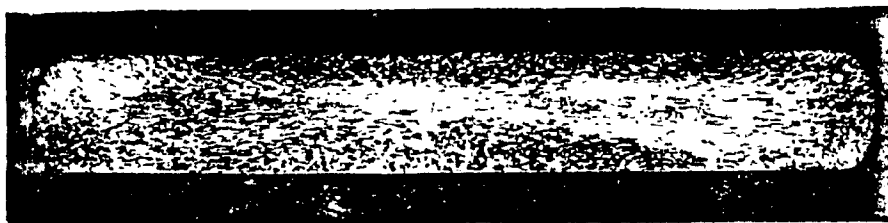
Initial 10 inch upset blank showing "dead metal" zone
